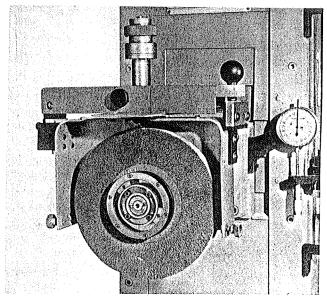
Over-the-Wheel Truing Attachment shown with wheel guard cover removed.
